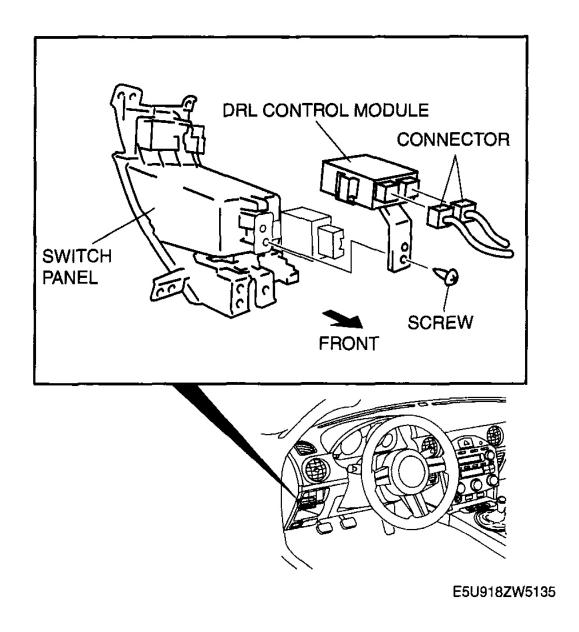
Identifying DRL Control Module Courtesy of MAZDA MOTORS CORP.
